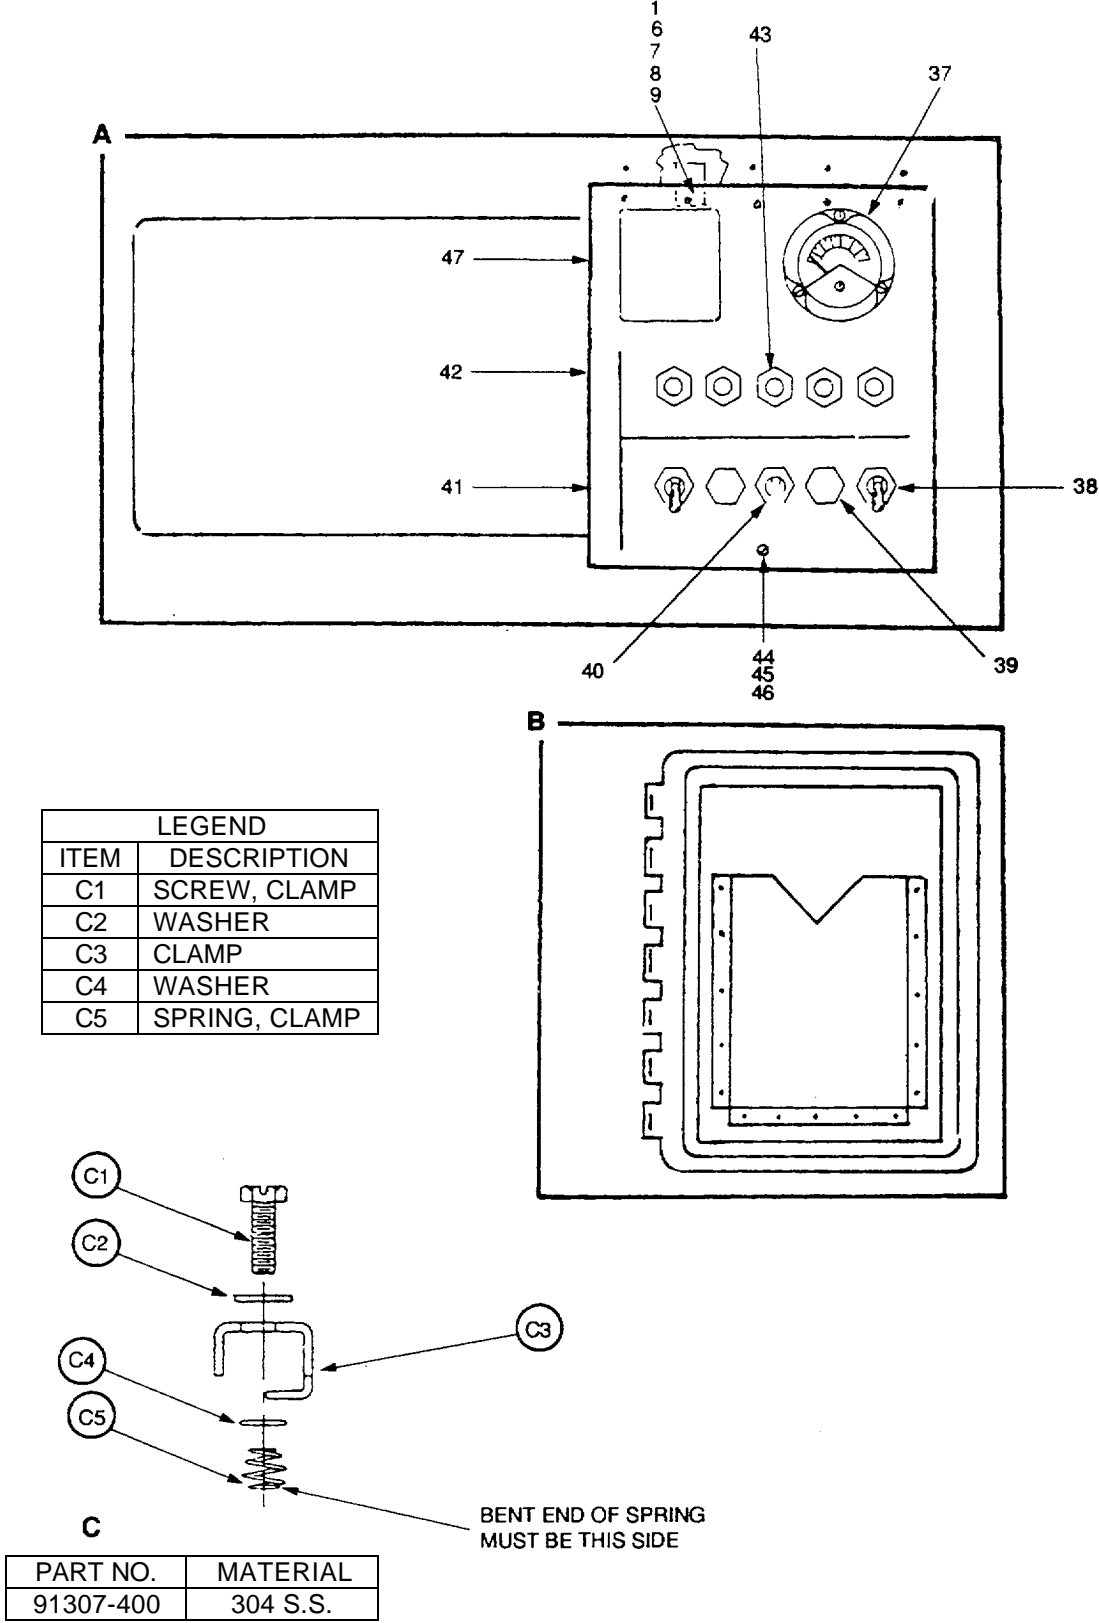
Control Console Assembly (Sheet 2 of 2).
